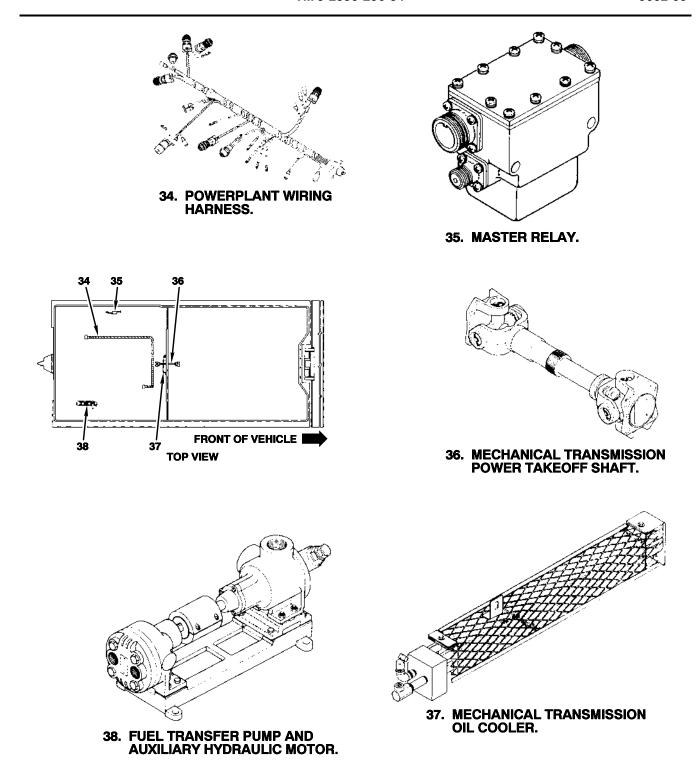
Location of Major Components, Assemblies, and Auxiliaries (Sheet 8 of 8).
